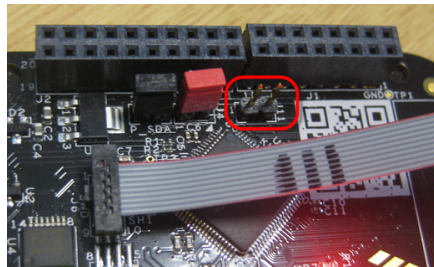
Step 3: Welding of header 2.54mm-pitch on the solder jumper SJ11;
